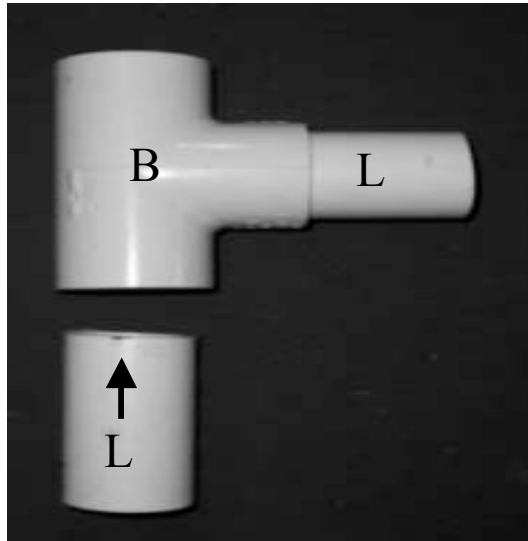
Step 3 – Wheelchair Side Frame.
